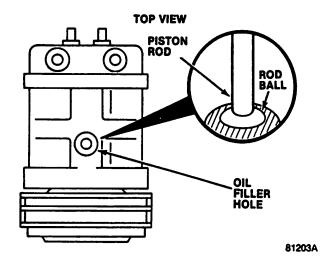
E-28 Checking Compressor Oil—Positioning Compressor Connecting Rod
